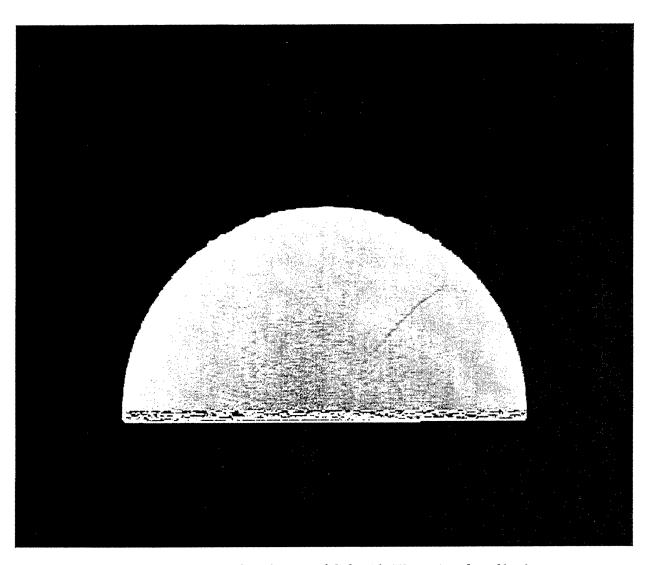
4.51 mm from bottom of disk with 65° rotation about X-axis.
